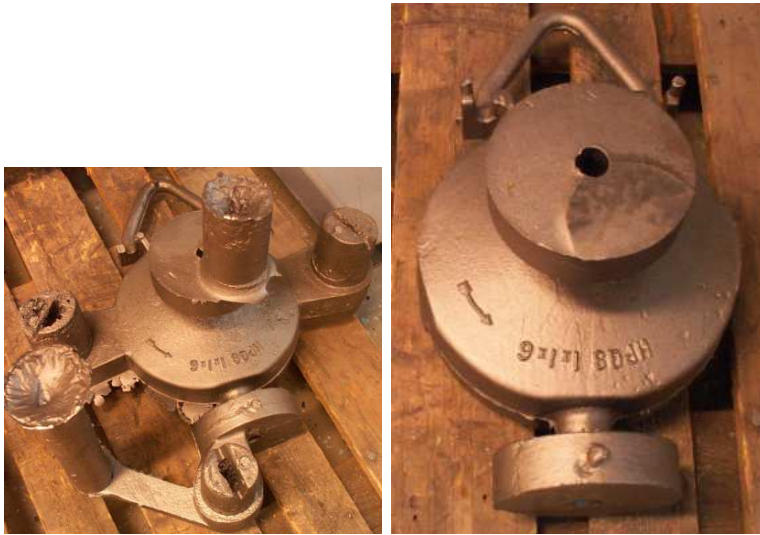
Example foundry workpieces. Left: before cutting. Right: after cutting.
